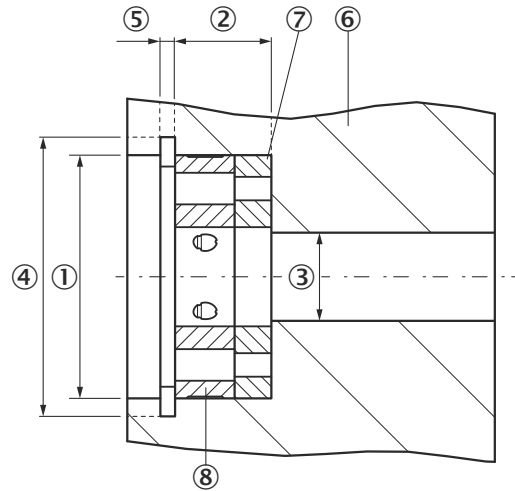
Preparation for ring magnet and C-magnet in piston rod with retaining ring in magnetizable material
